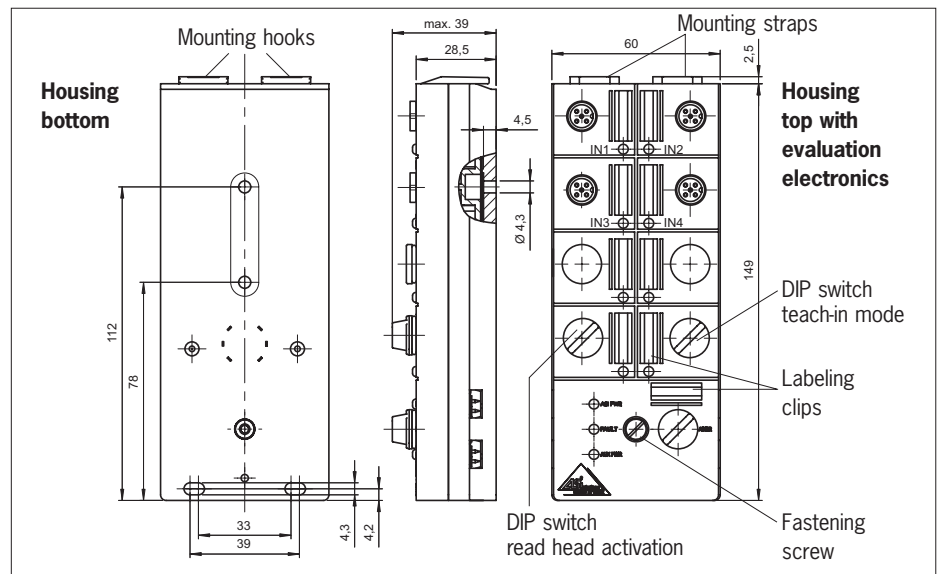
Dimension drawing VAA-4E-IEI... CONTROL...
